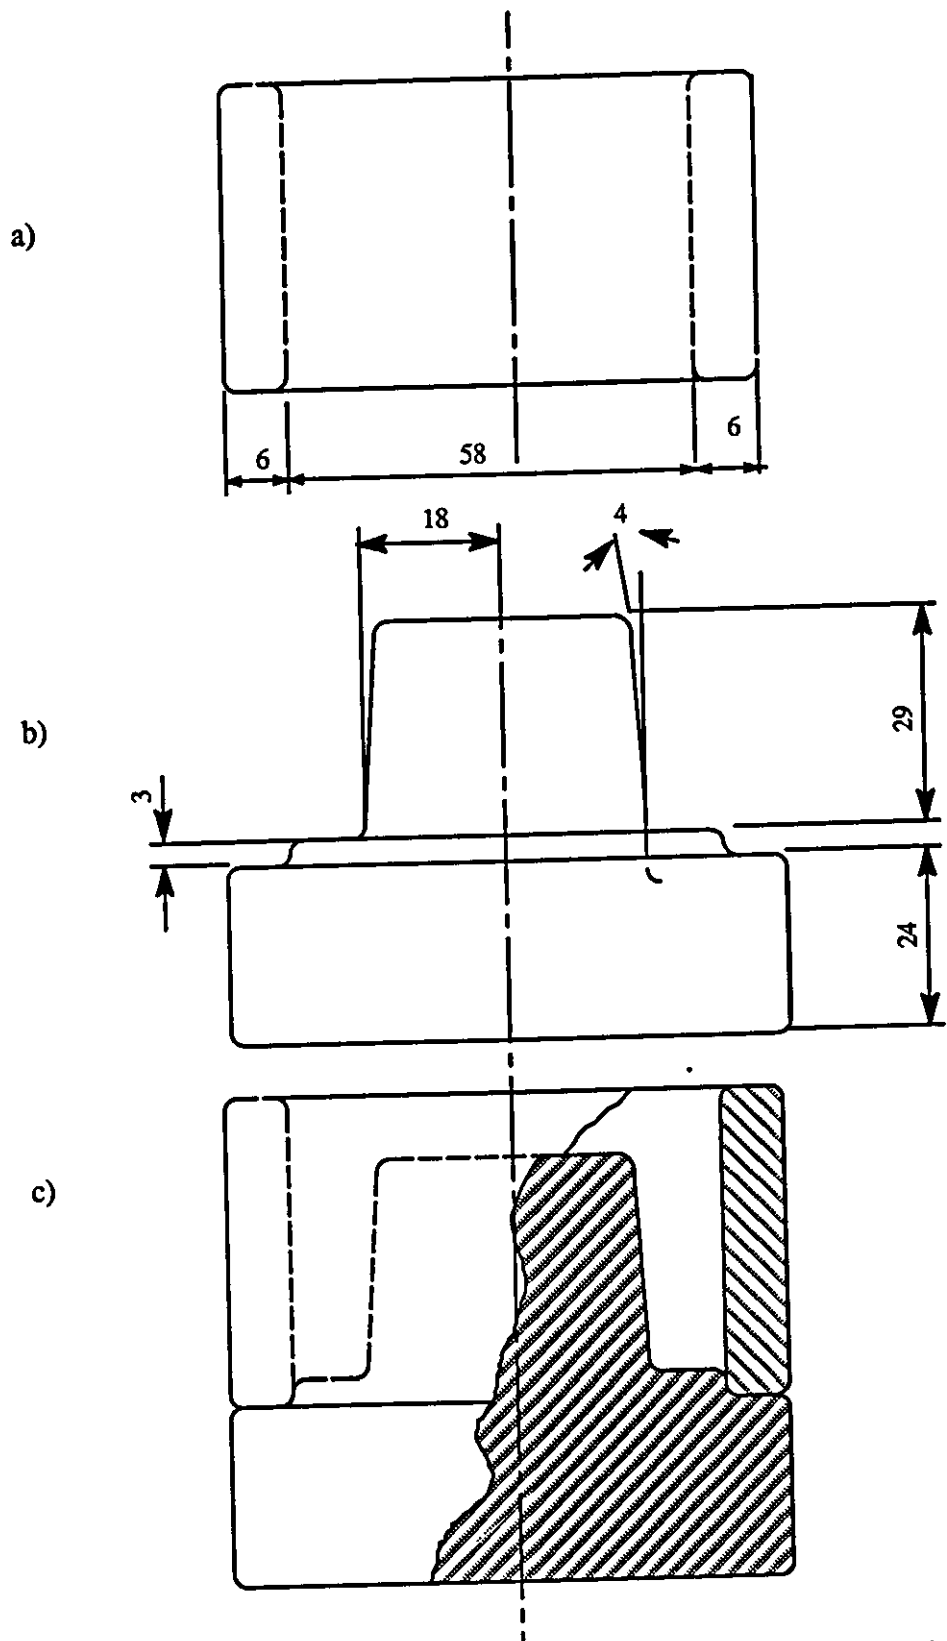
Schematic drawings of the Shaw process mould a) moulding box
